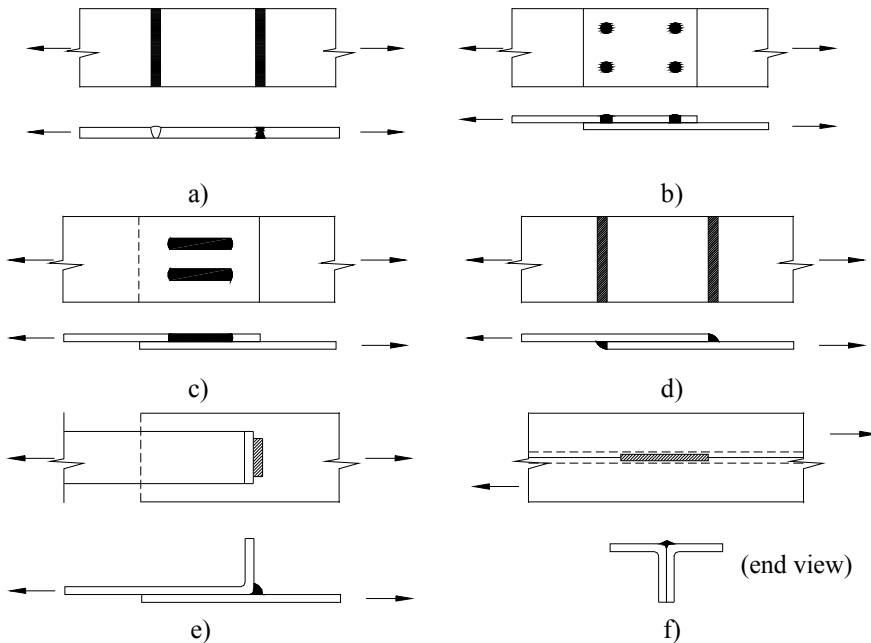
Types of arc (fusion) welds (Yu, 2000): a) Groove welds in butt joints; b) Arc spot weld (puddle weld); c) Plug and slot welds; d) Fillet welds; e) Flare bevel groove weld; f) Flare V-grove weld
